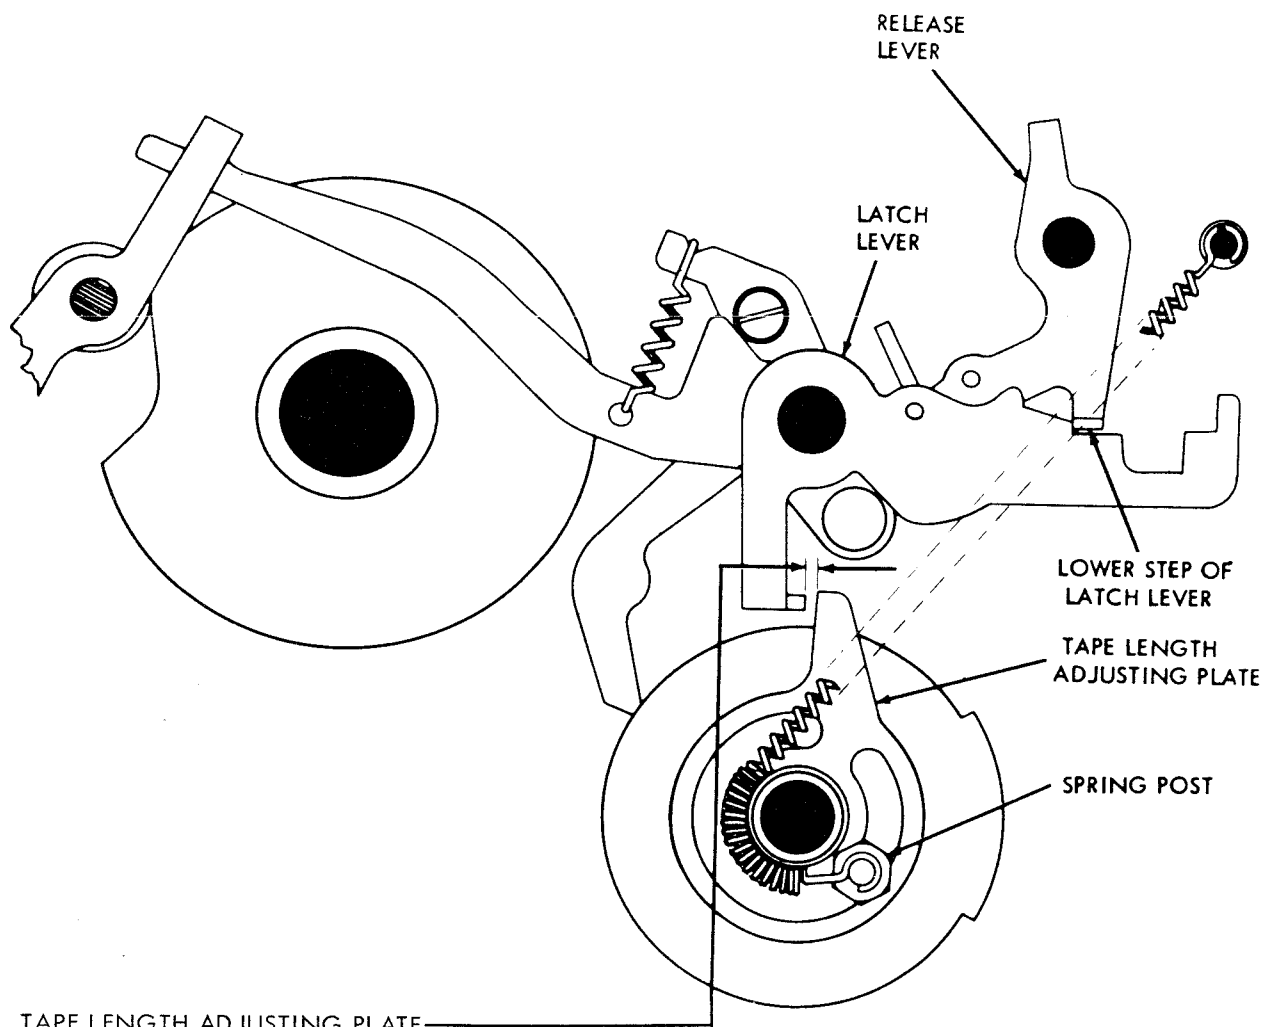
TYPING REPERFORATOR TT-375/UG, REMOTE CONTROL NON-INTERFERING BLANK TAPE OUT MECHANISM
